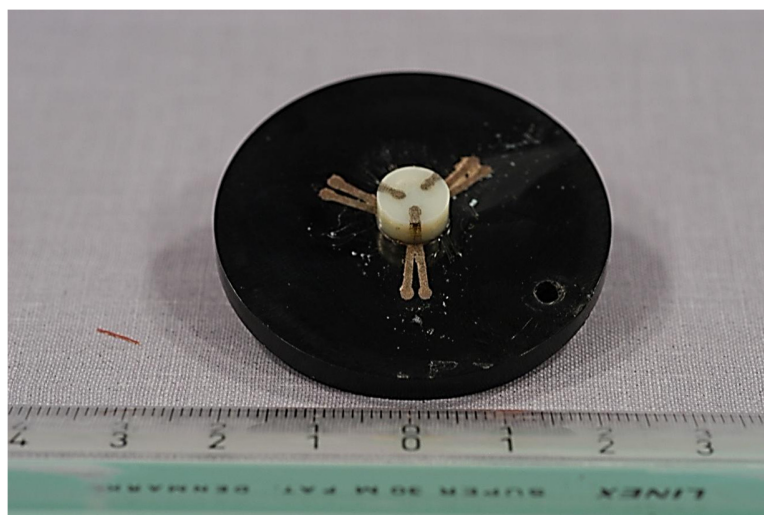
A workpiece made by 2 shot injection moulding. The three V shape patterns were made separately. The workpiece was tilted when making each pattern. Each pattern was made by one shot laser patterning. After plating, the laser track on the wall is not fully plated.
